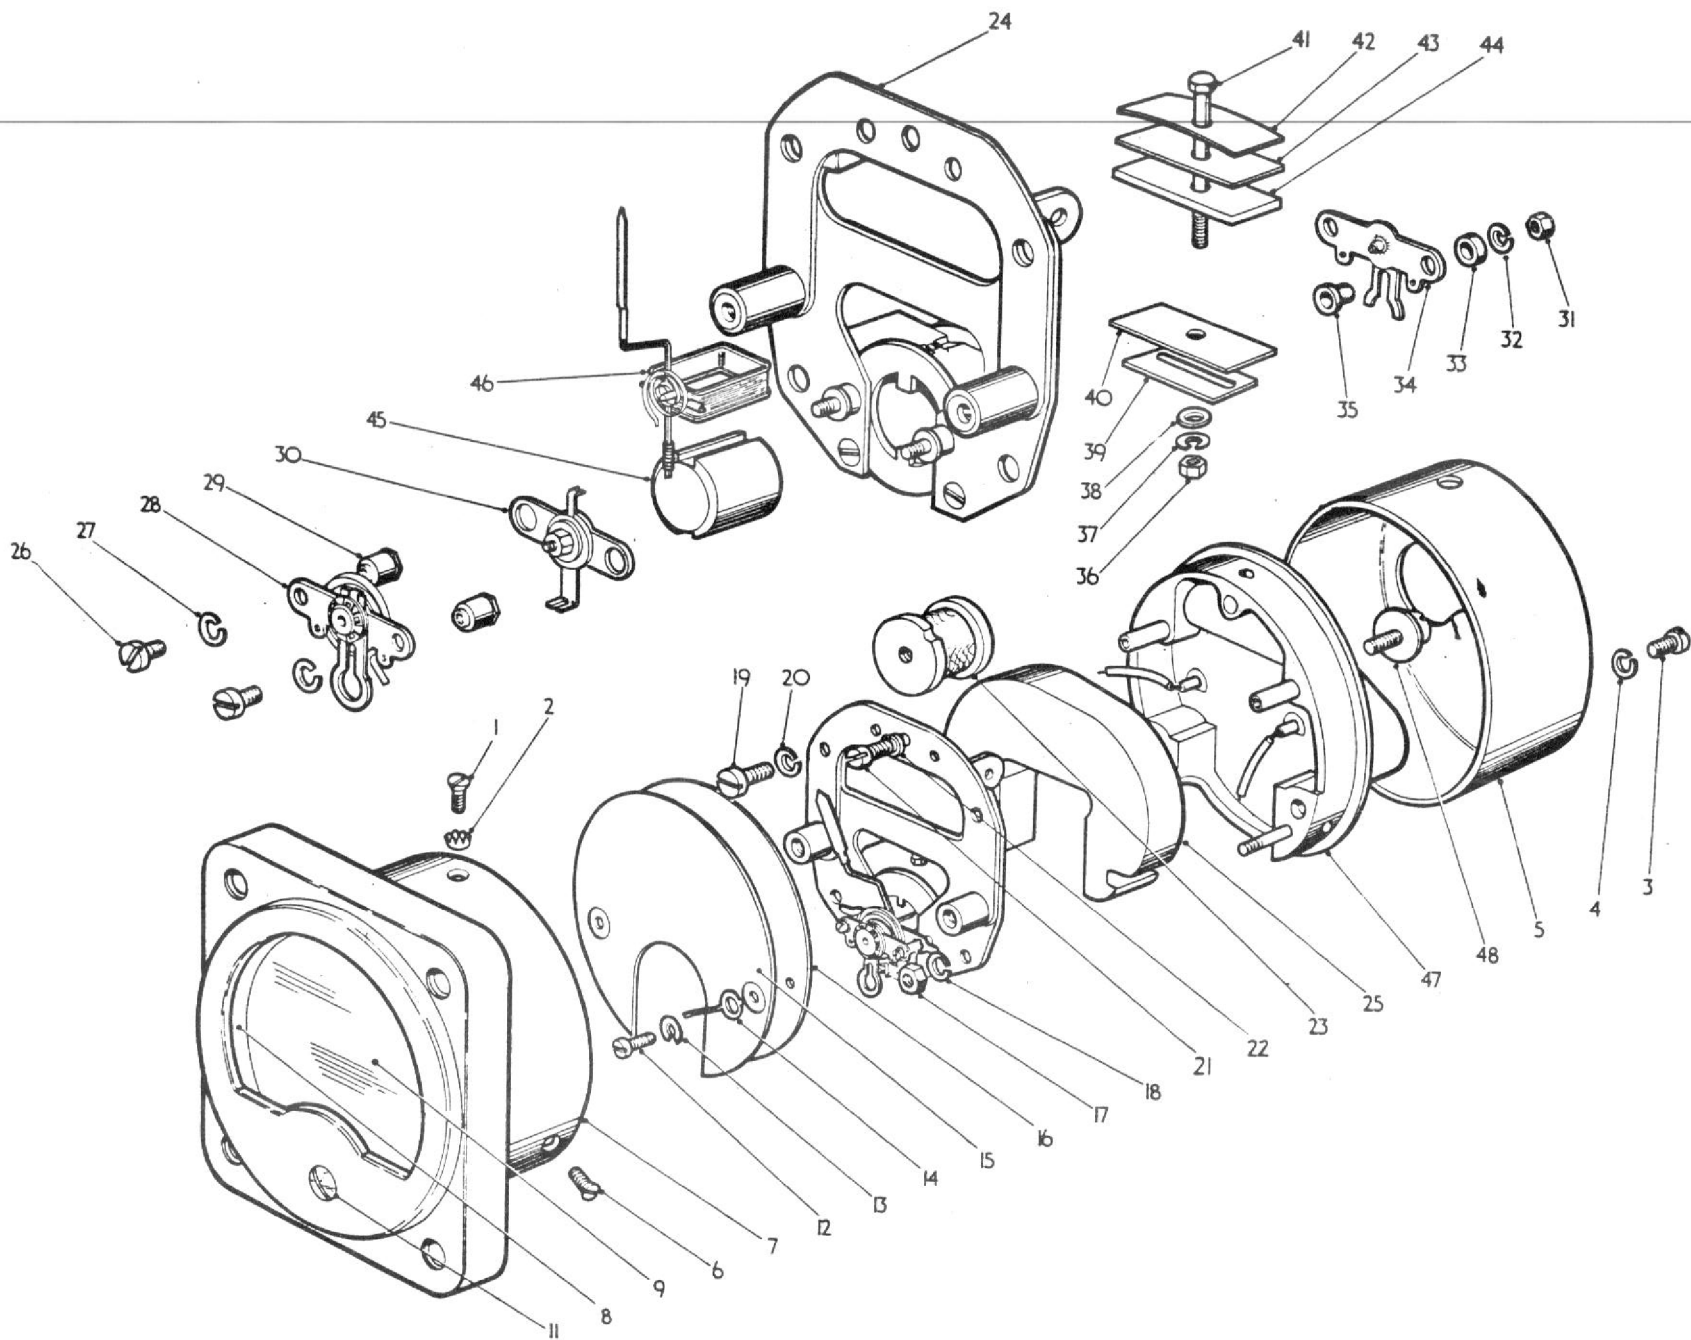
Exploded view of indicator - Model S.64 Form 3
